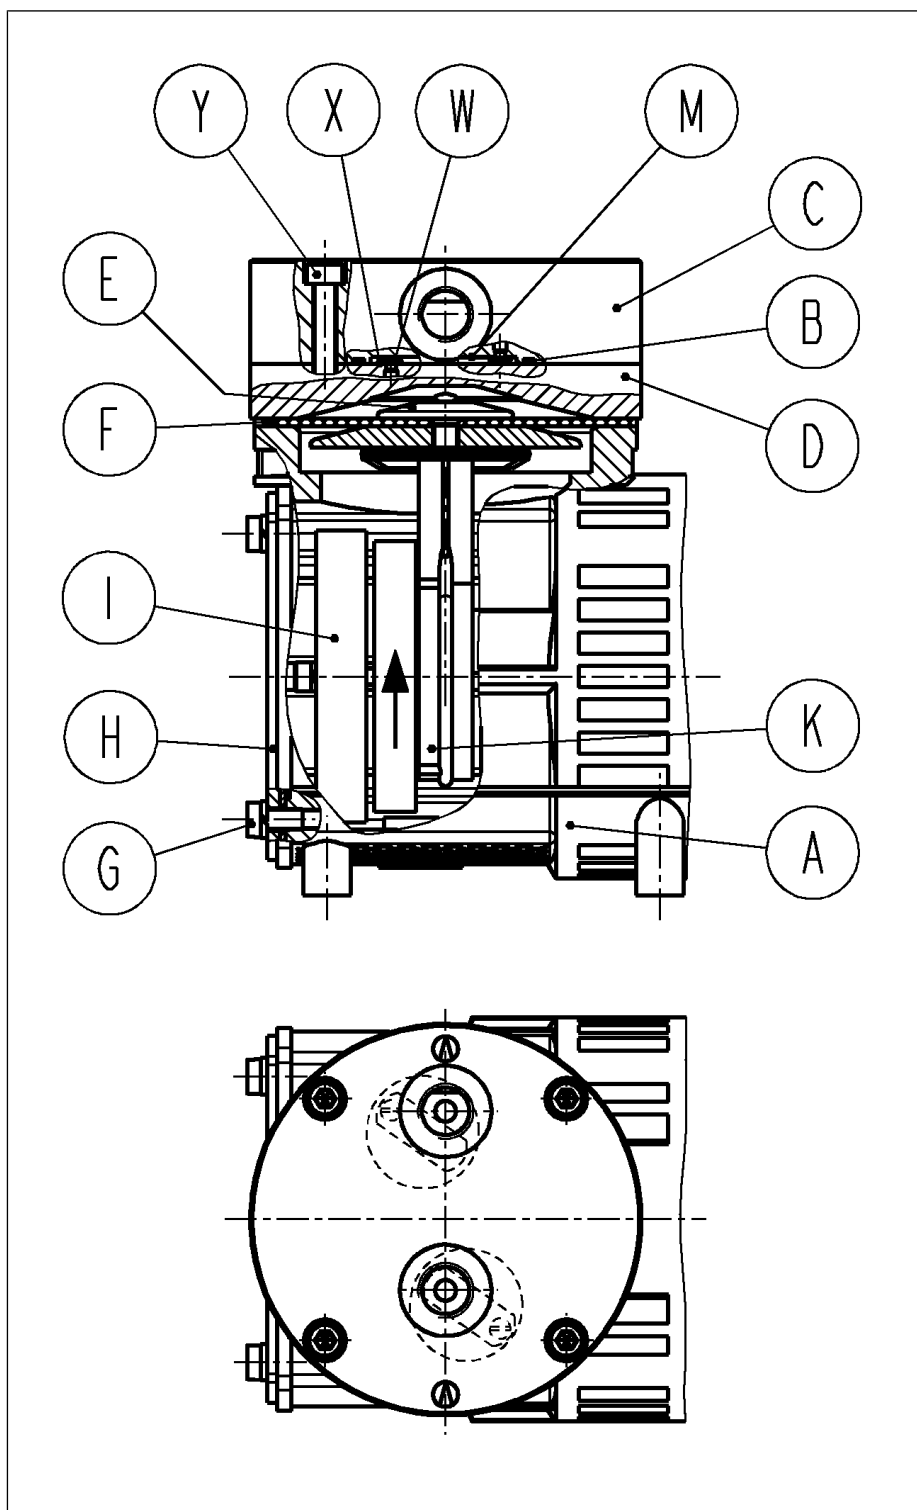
Pump parts for pump models with smooth heads and reed valves (stainless steel, symbolic)
